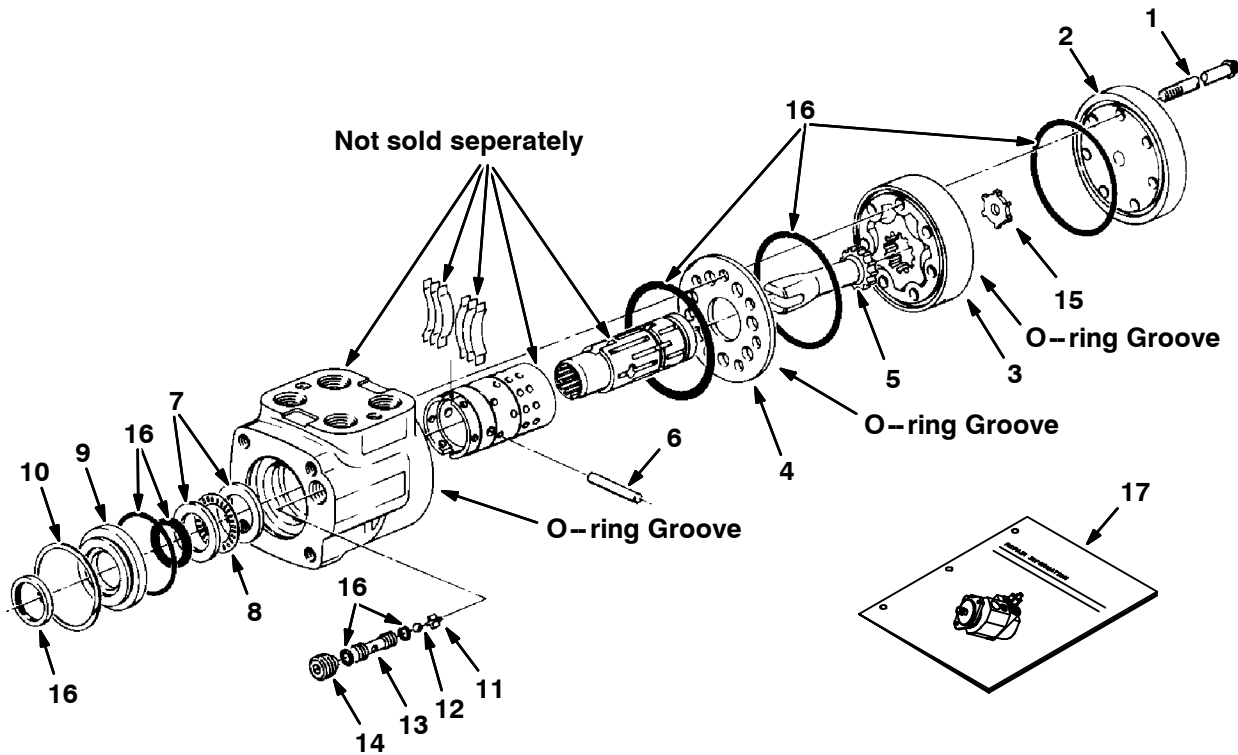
Hydraulic Steering Valve Breakdown, 57982
